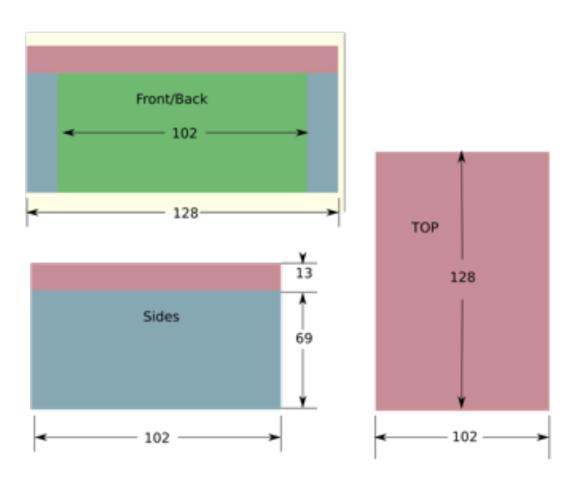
Bench Assembly (Dimensions in mm) (bench..svg.png)
